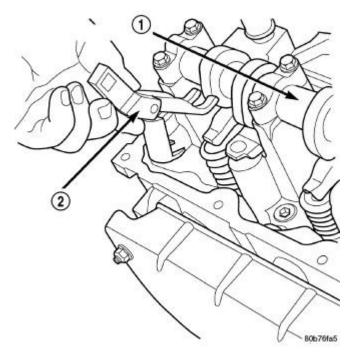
Removing/Installing Rocker Arms Courtesy of CHRYSLER LLC
